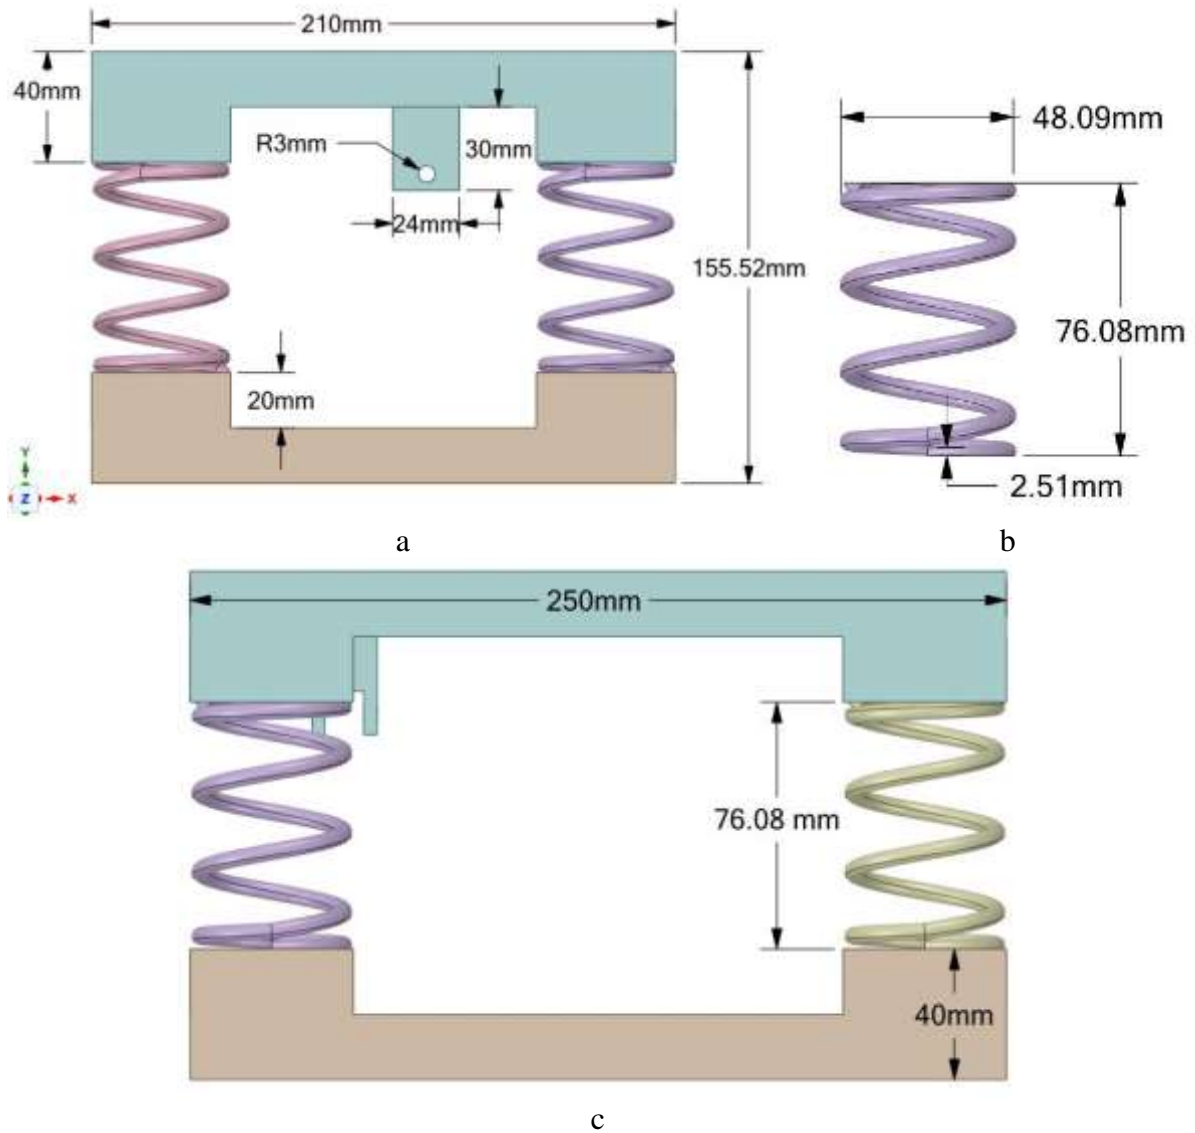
Dimensions of the a) front, b) spring and c) the side of the harvester unit
